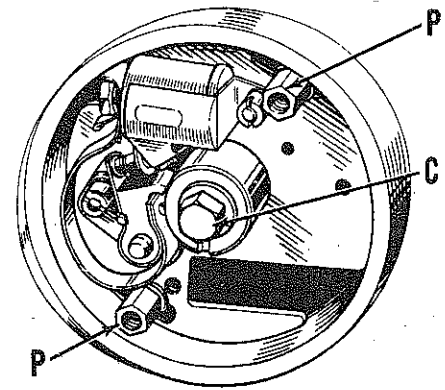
The ignition cam is located at right end of the engine camshaft on later models. Refer to text for adjustment. Make certain that center screw (C) is tight.
